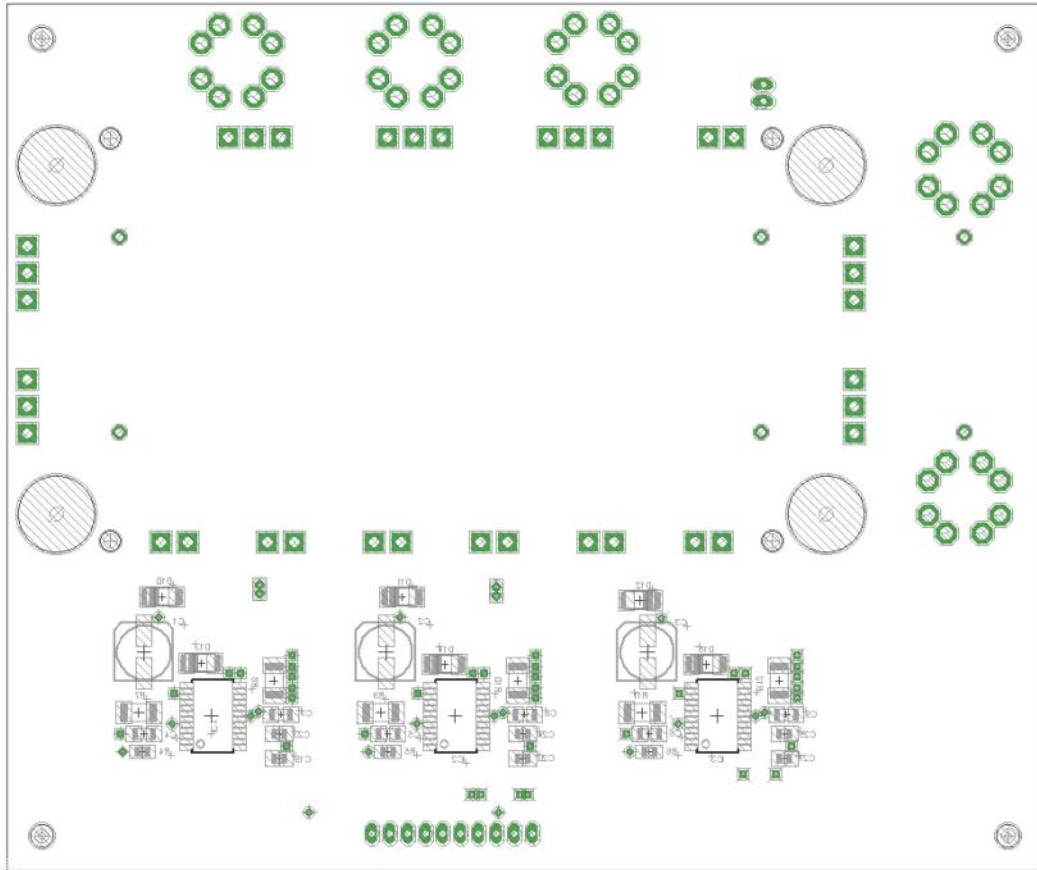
Bottom Component layer ("silk screen" - bottom)
